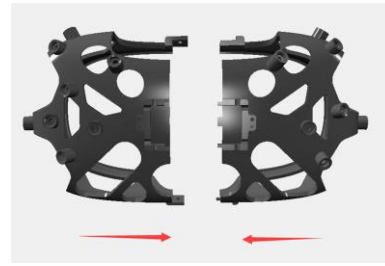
The VIVE holder consists of two pieces that slide over the HMD from the side.
